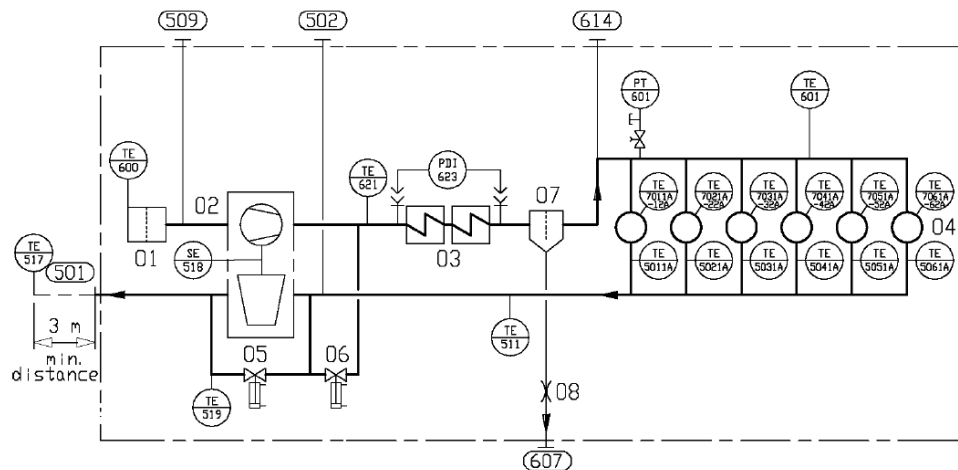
Charge air and exhaust gas system, in-line engines (DAAE017293D)
